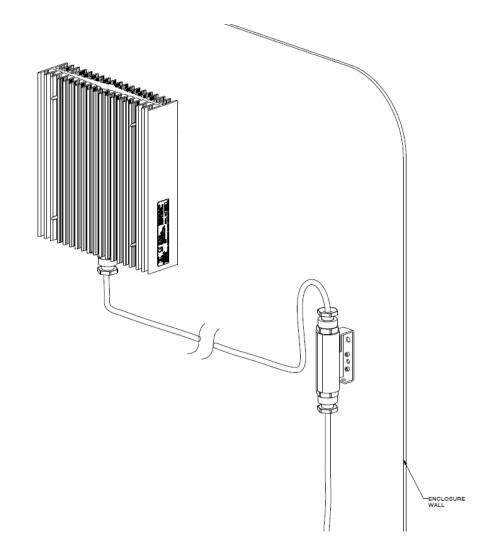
FXT-DI Thermostat & heater mounting arrangement – EXHEAT Industrial Ltd.
